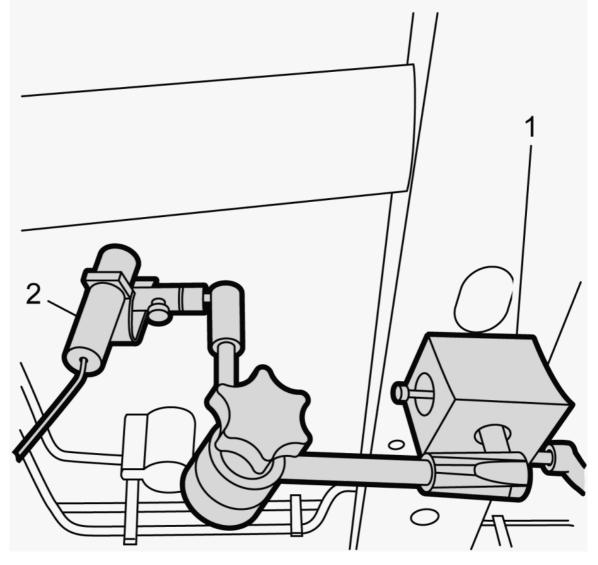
Magnetic Mounting Fixture Courtesy of GENERAL MOTORS COMPANY
